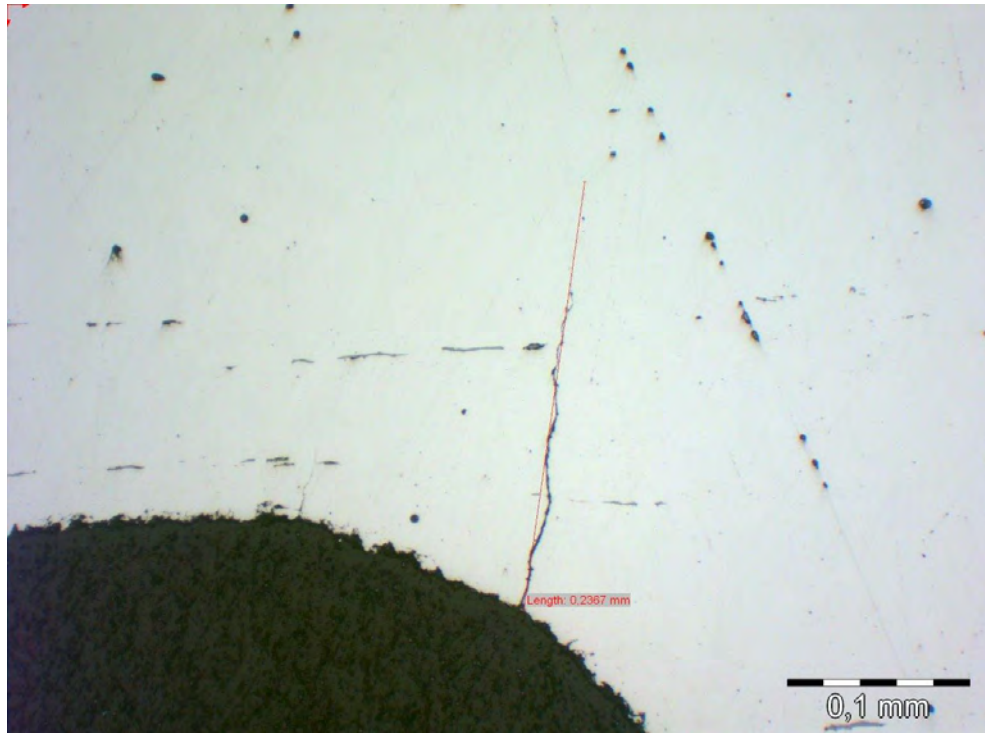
Cut one in crack at segment A, second ridge on barrel no. SFK 0120-A
